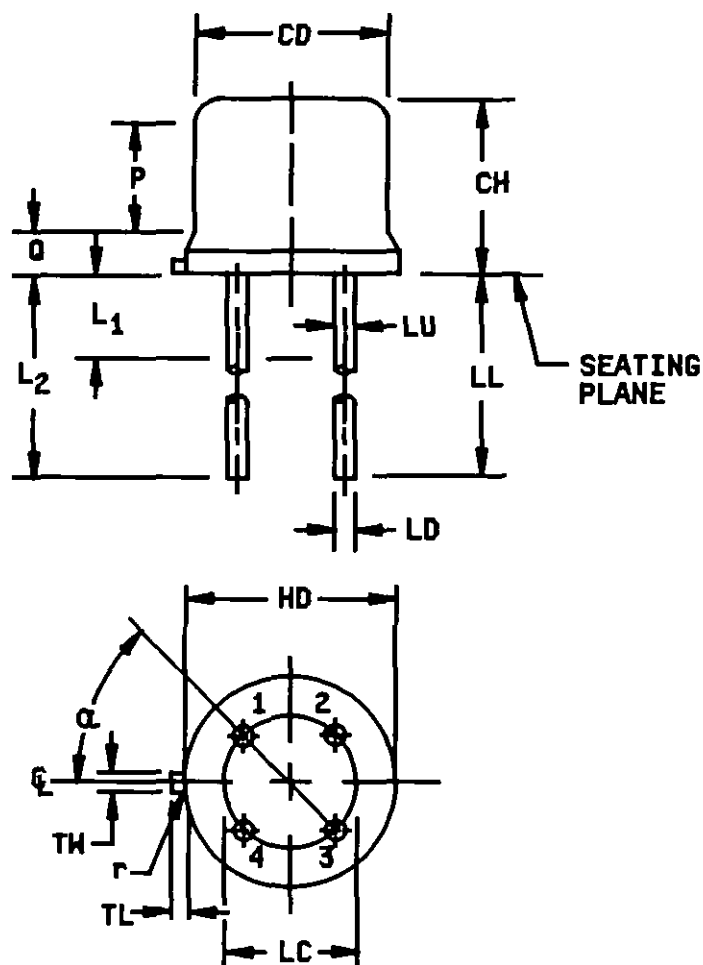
Physical dimensions of I-2 family (Similar to 10-18, 10-46) - Continued.
